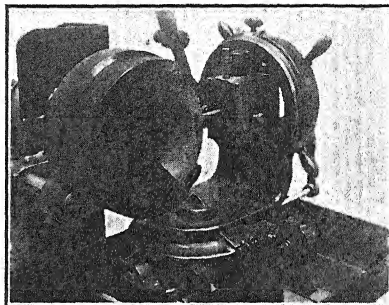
Second Position of Tool for Grinding the Side Relief.
